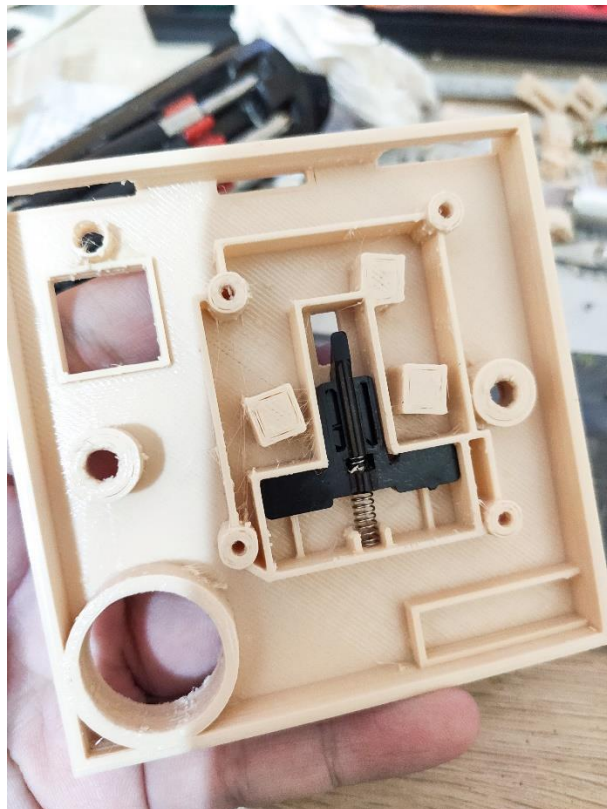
Conventional Protection of The Smart Wall Outlet Structure
